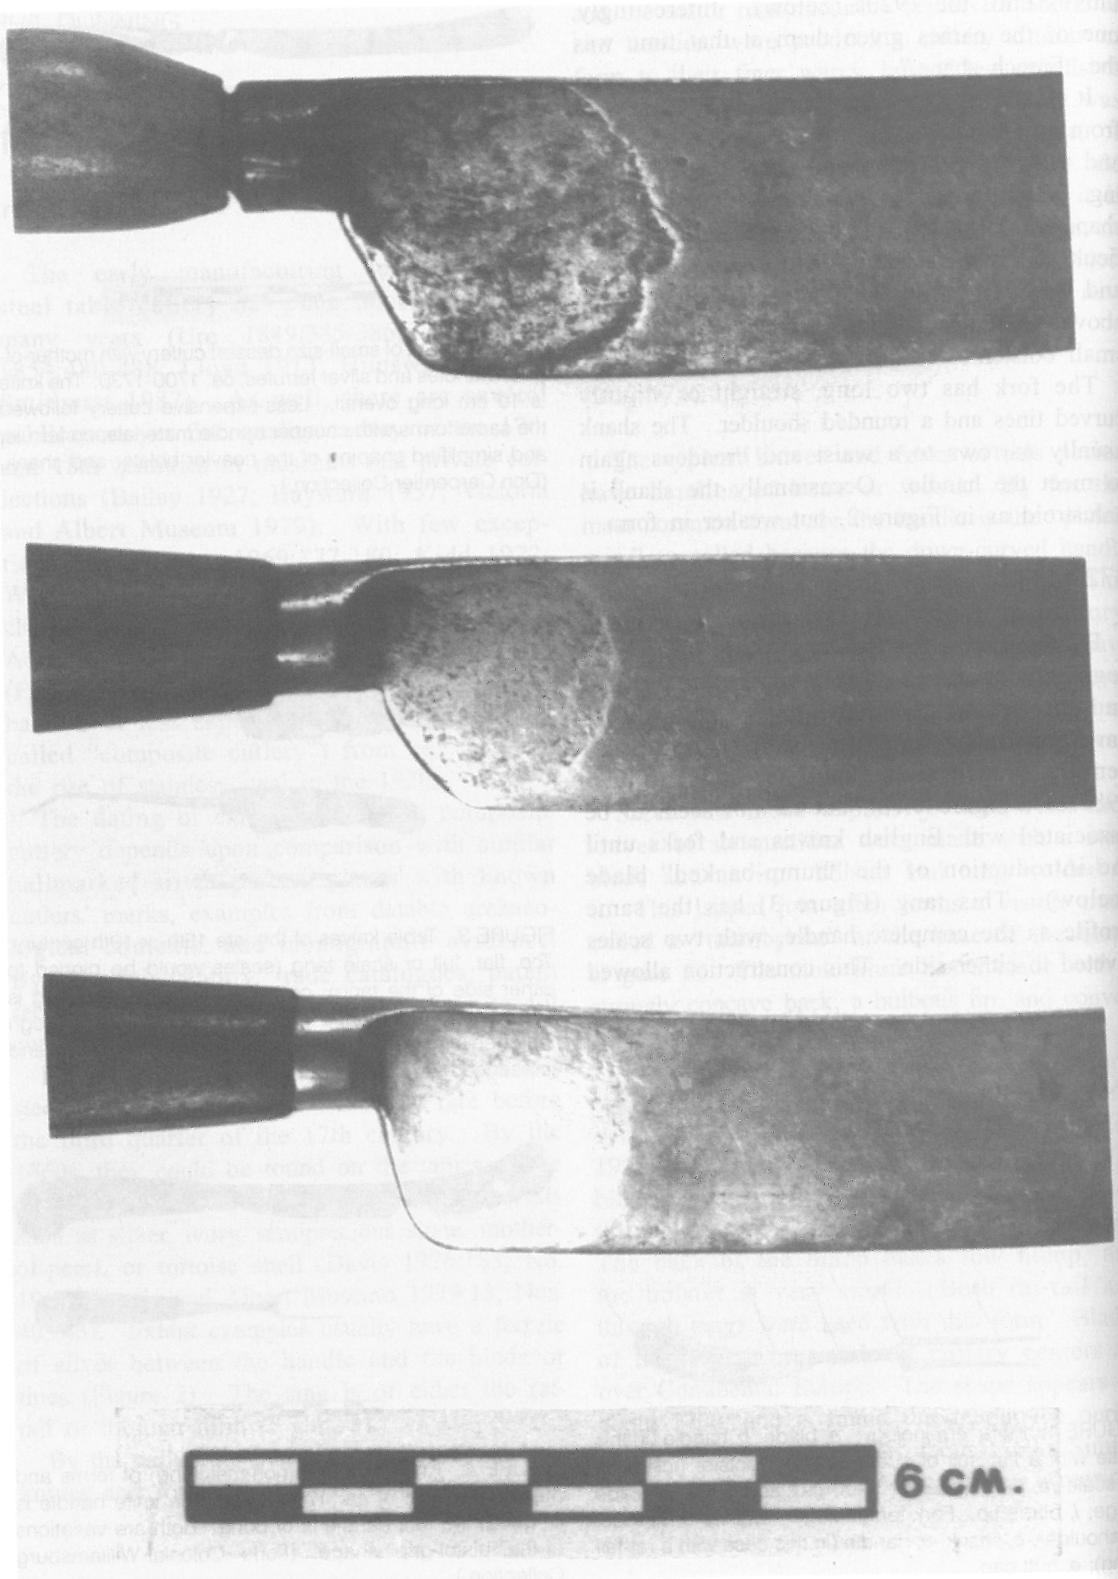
Late 18th- or 19th-century knife blades showing the "thumbprint" caused by the lap weld between the steel blade and the iron tang and bolster.
